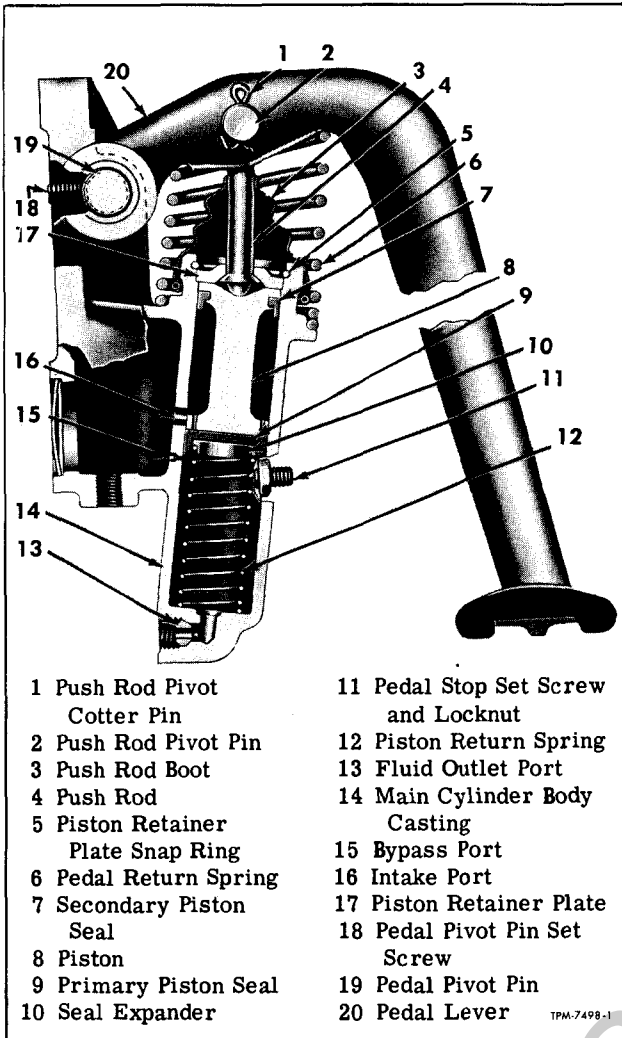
Clutch Master Cylinder (Steel Tilt Cab Models, Except TM 80 and TV 70)
